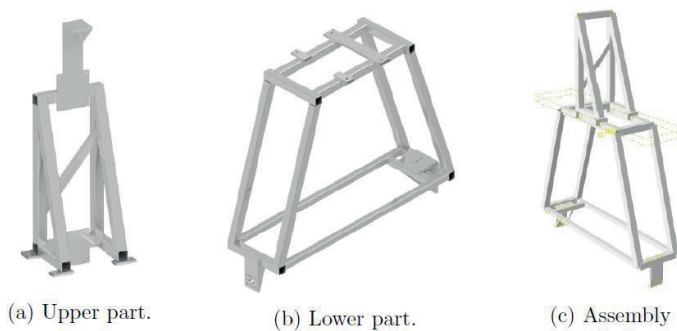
Chassis Upper part (a), lower part (b), and the final assembly (c).
